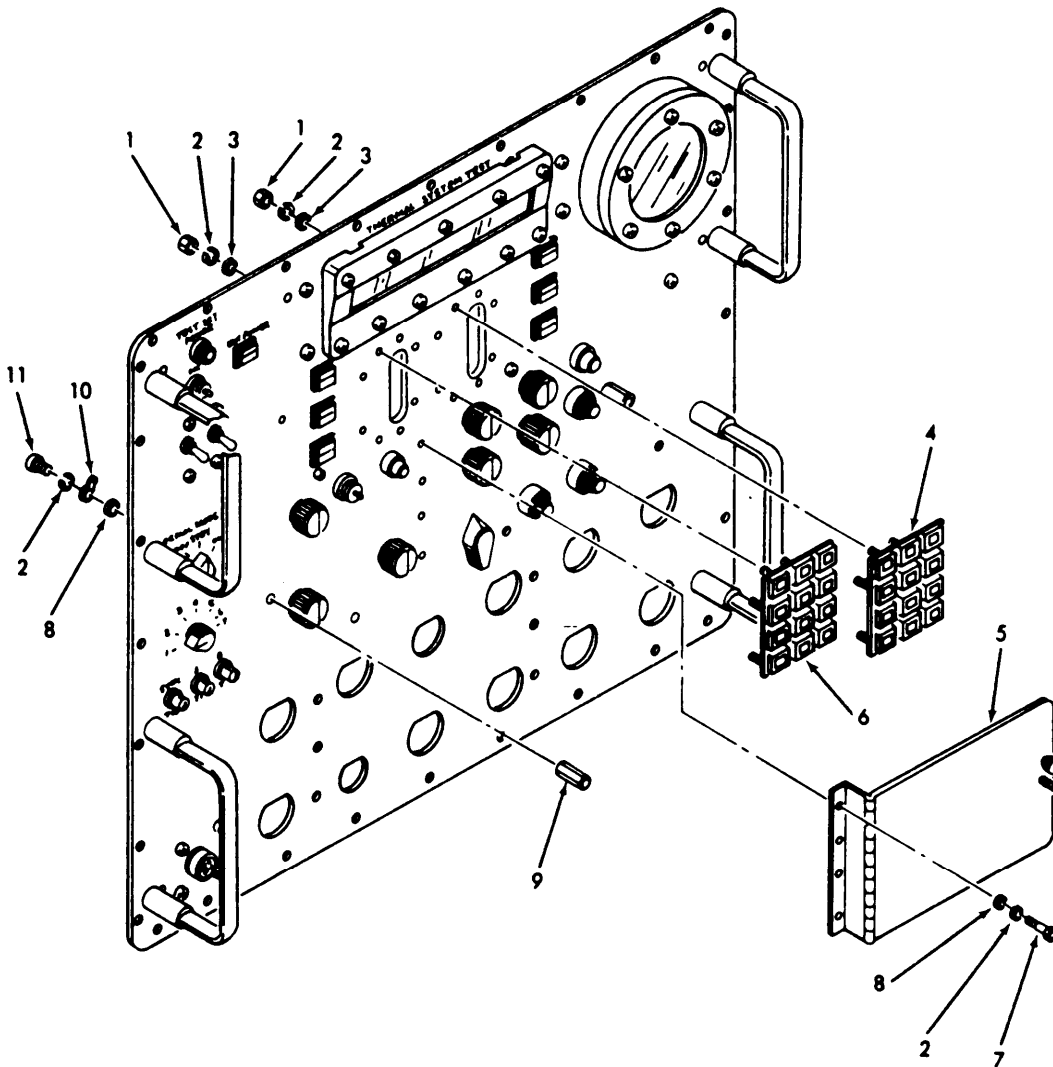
PANEL ASSEMBLY AI COMPONENT PARTS
